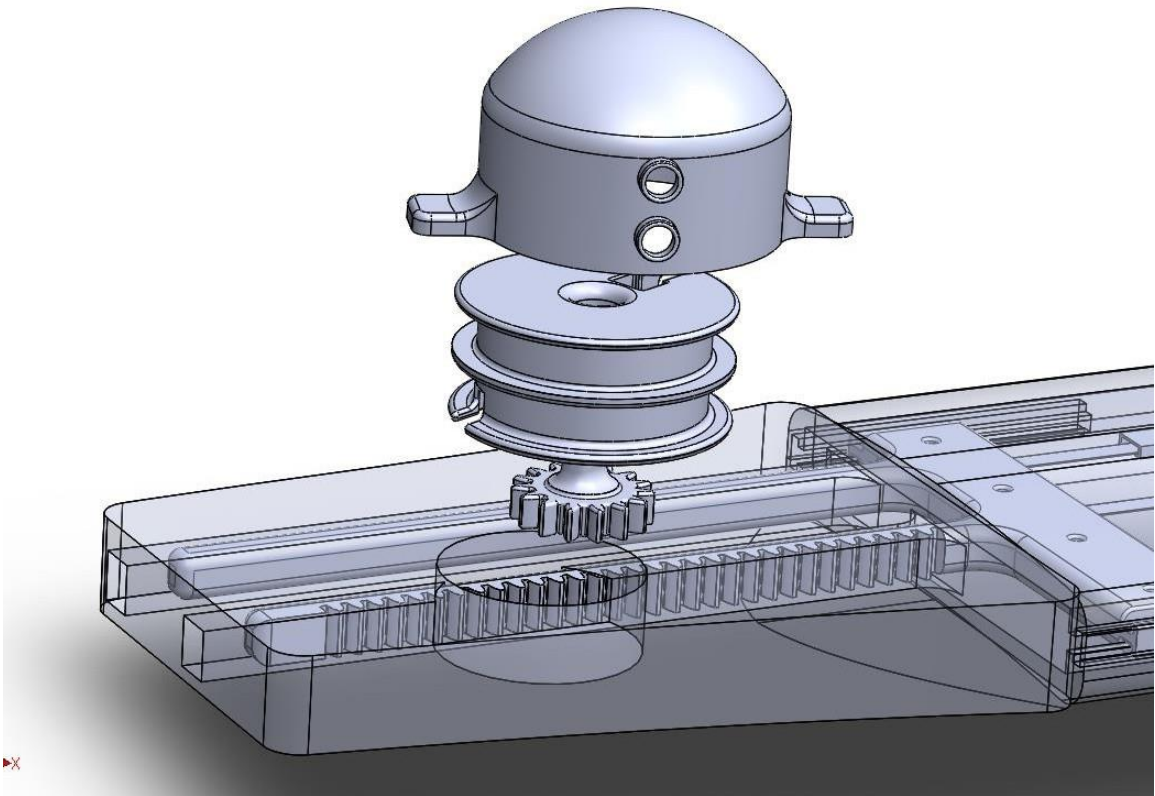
Final CAD Model: Exploded view of actuation system on Hand module.
